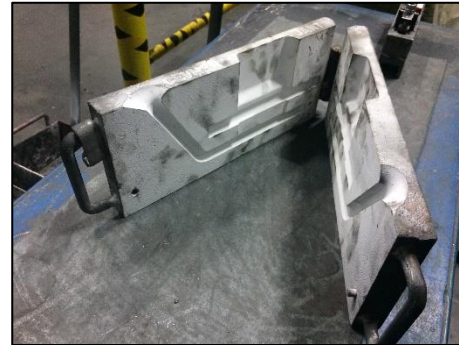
(a) LPDC (Low Pressure Die Casting) method
